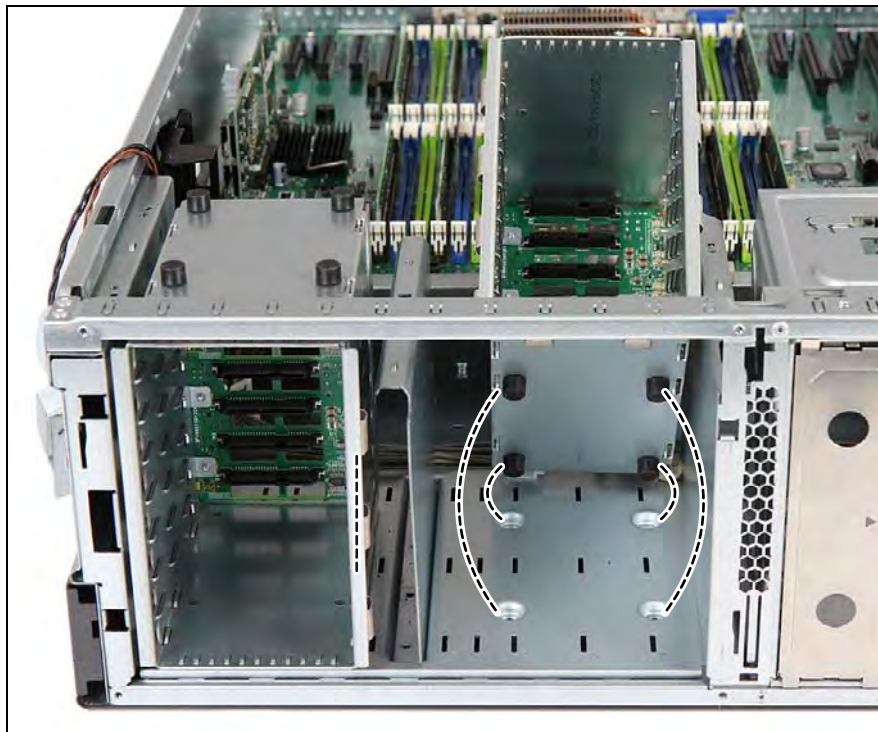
Mounting the second 2.5-inch HDD drive cage (A)
